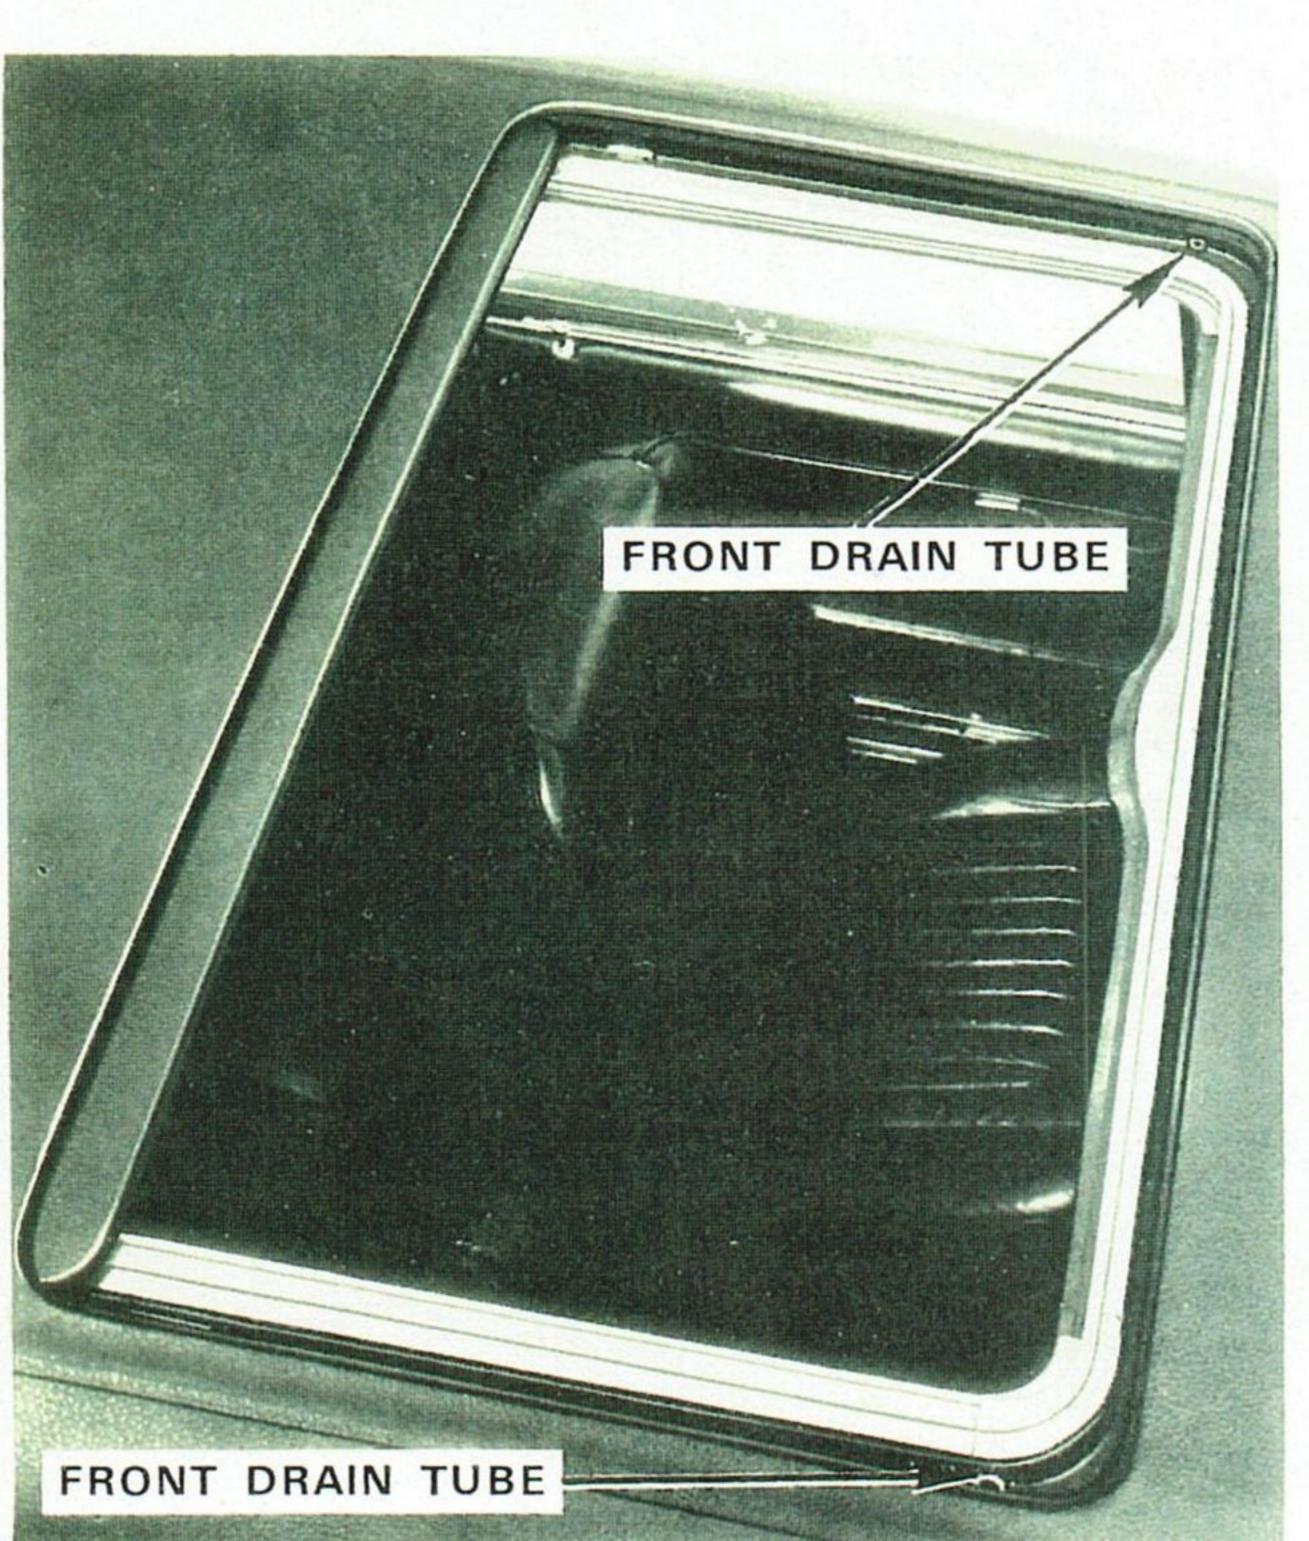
Sun Roof Panel Ramps and Drain Tubes
